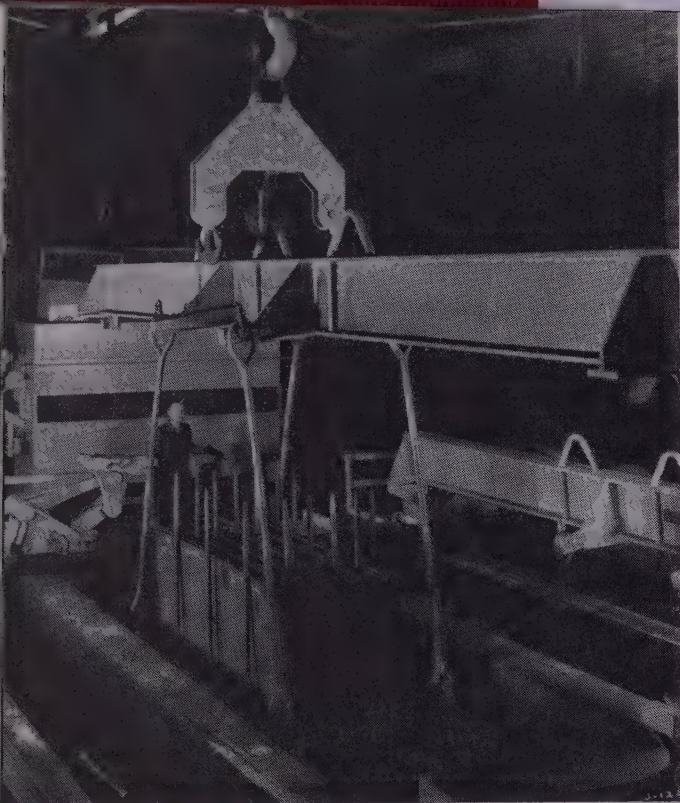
Rocker-type machine for pickling sheets for subsequent processing in a galvanizing pot.
